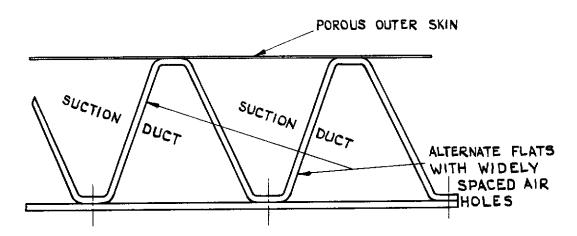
INVERTED CORRUGATION - SHEET CONSTRUCTION.
